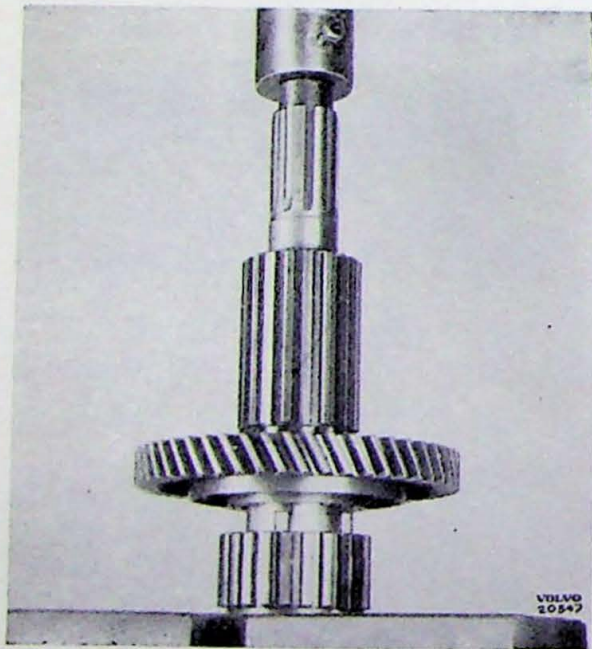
29. Fitting the synchronizing hub on the mainshaft.
